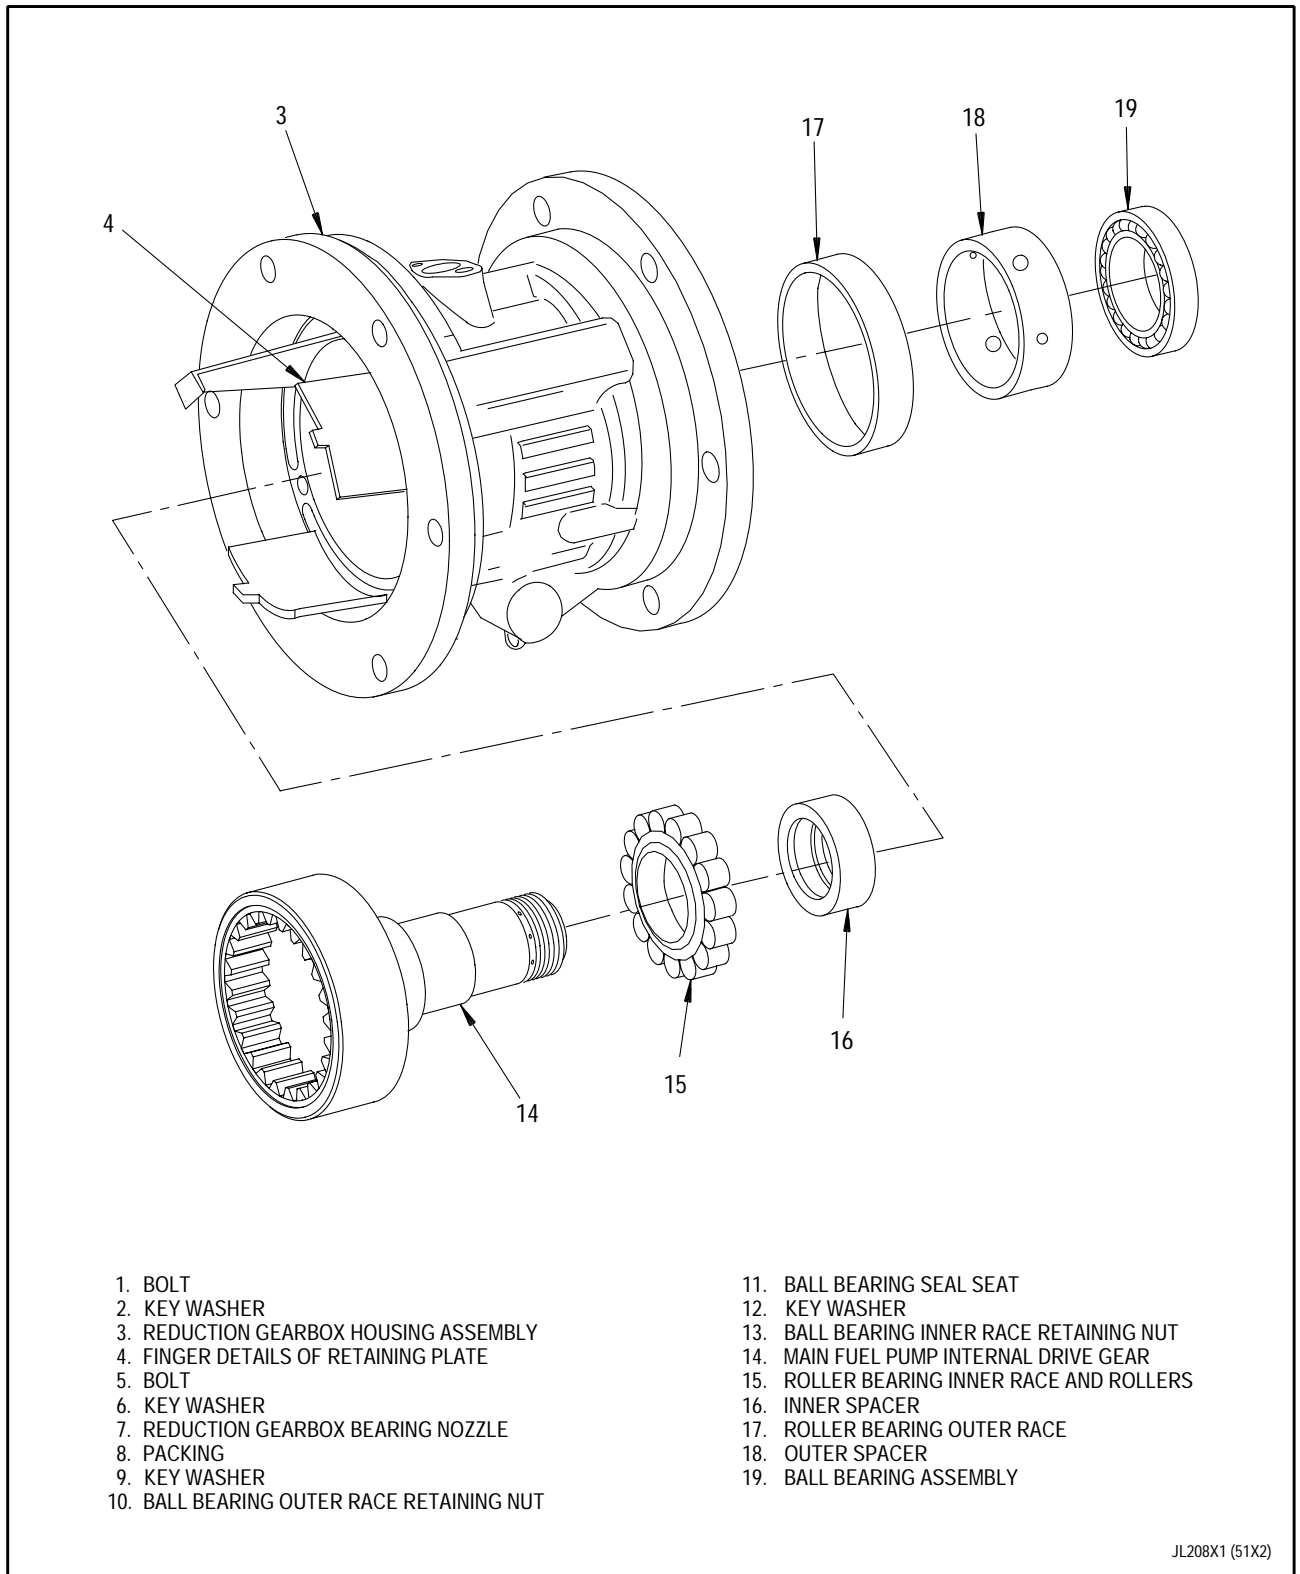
Reduction Gearbox Housing Assembly - Assembly (Sheet 1 of 2)
